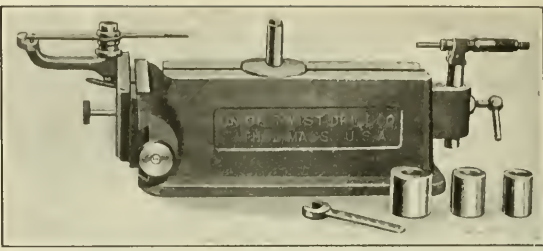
Similar Device to that shown in Fig. 46, for testing Under-cut on Teeth of Milling Cutters and Hobs
